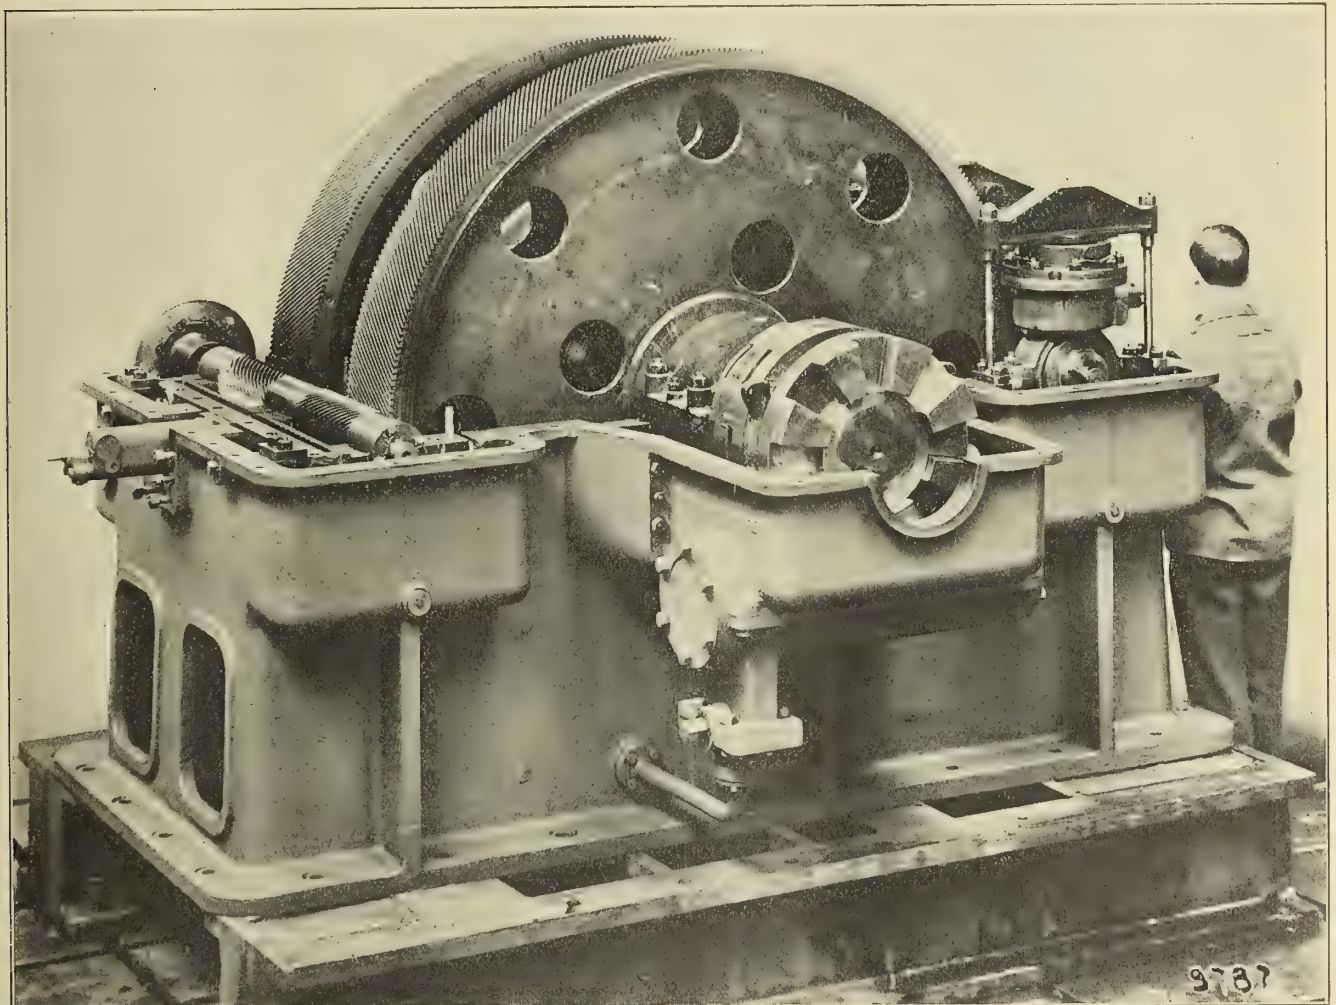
Westinghouse Reduction Gear for Cruising Turbines of Battleship *Pennsylvania*. Speed Reduction, 1,800 to 120; Horsepower Transmitted, 1,600; Weight, 23,000 Pounds
